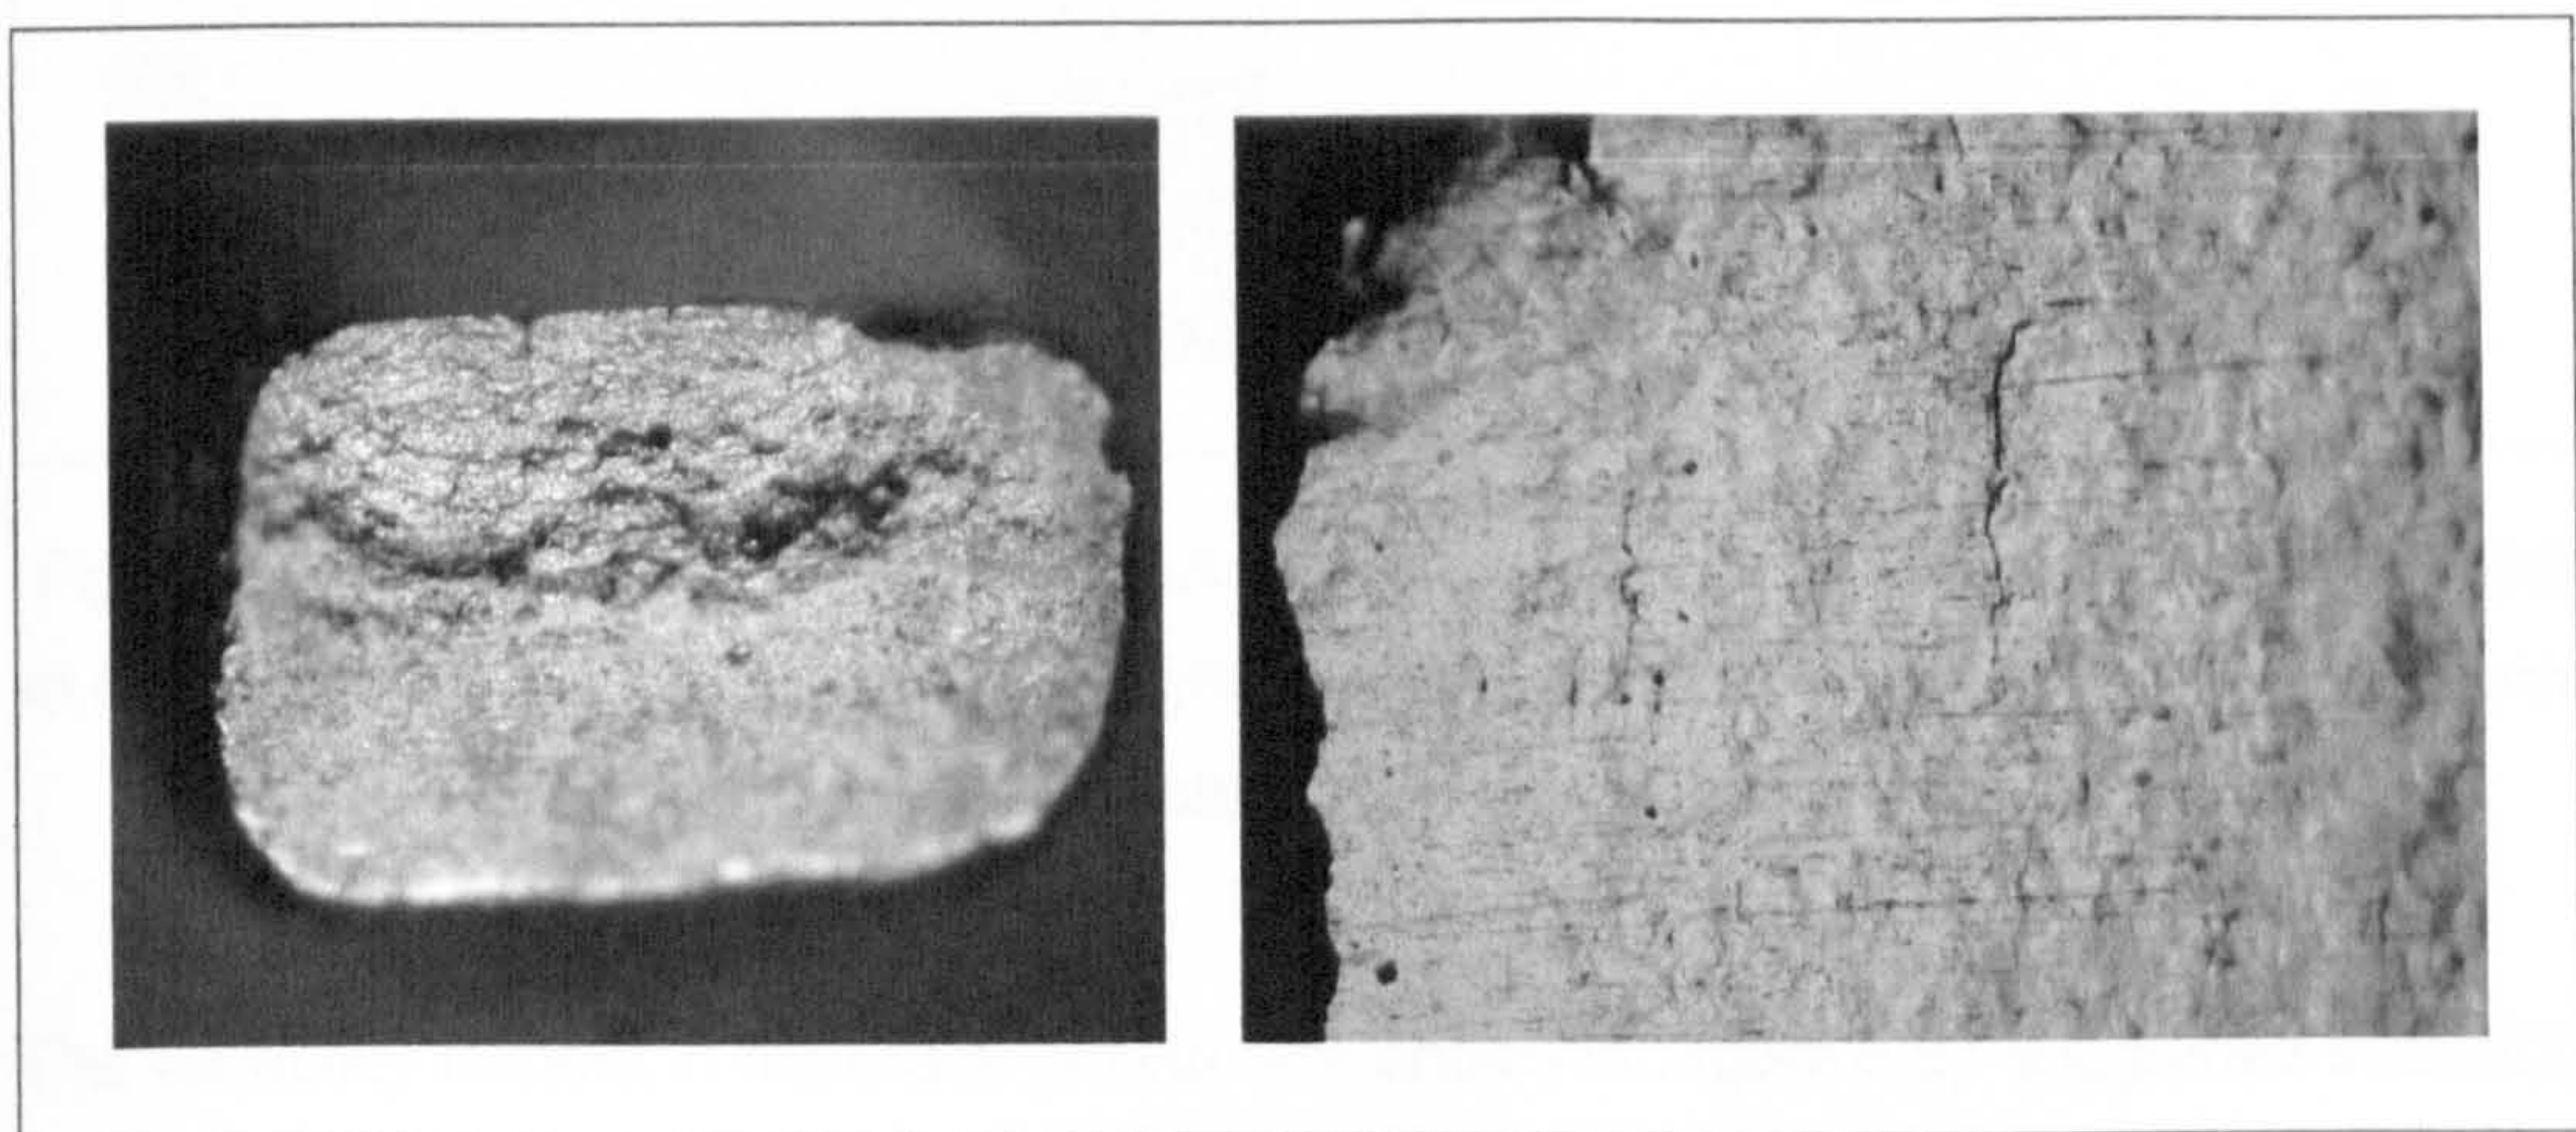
MIG LI SCG fracture surface (left) and path of secondary cracks (right).
